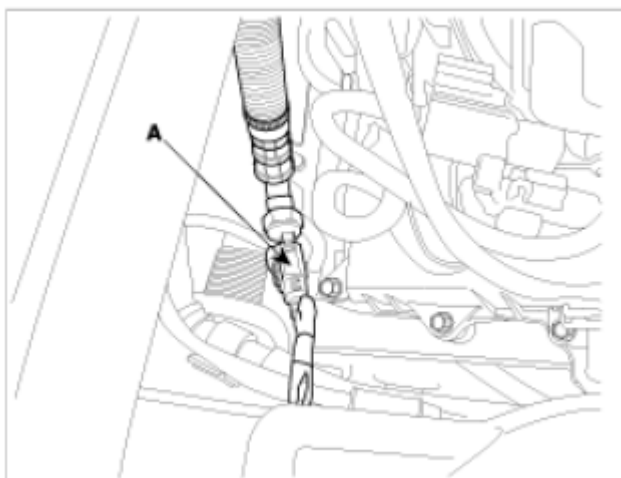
Identifying RH Injector Connector And Ignition Coil Connector (3.3L)
